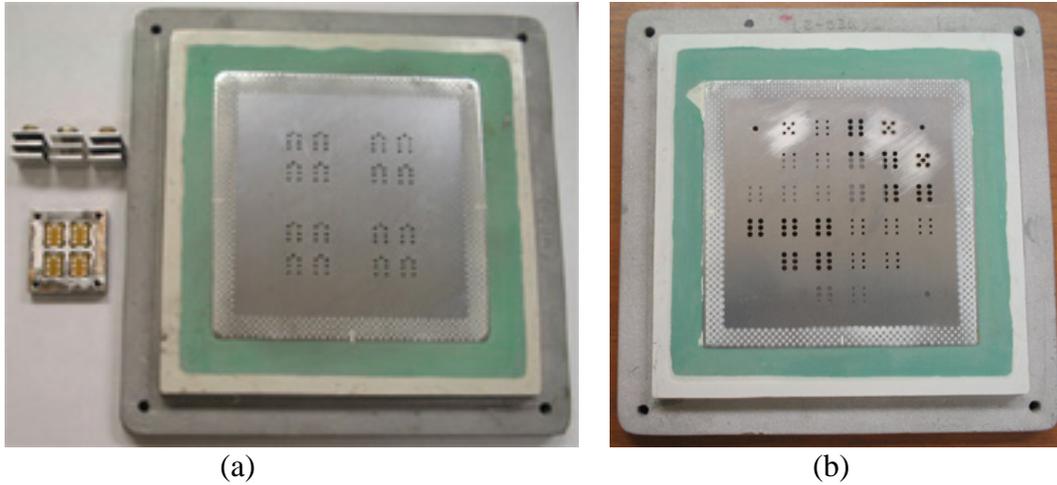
The stencil masks and fixtures used for stencil-printing silver paste. (a) The stencil pattern designed for the IXSD35N120A bare dies, and (b) the pattern for the drain terminals of the silver joints.
